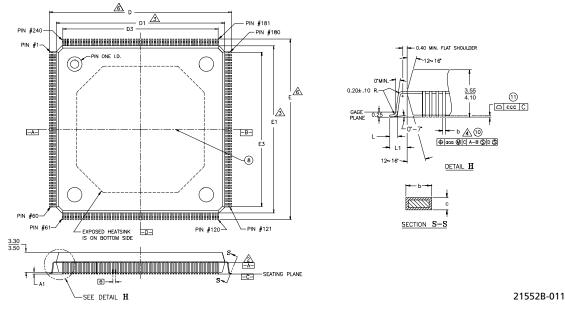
240-Lead Metric Cavity-Up Package with a Heat Sink (PQE)
